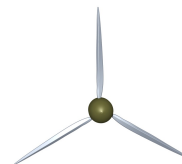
Front View of CAD Drawing of Cruise Propeller.
